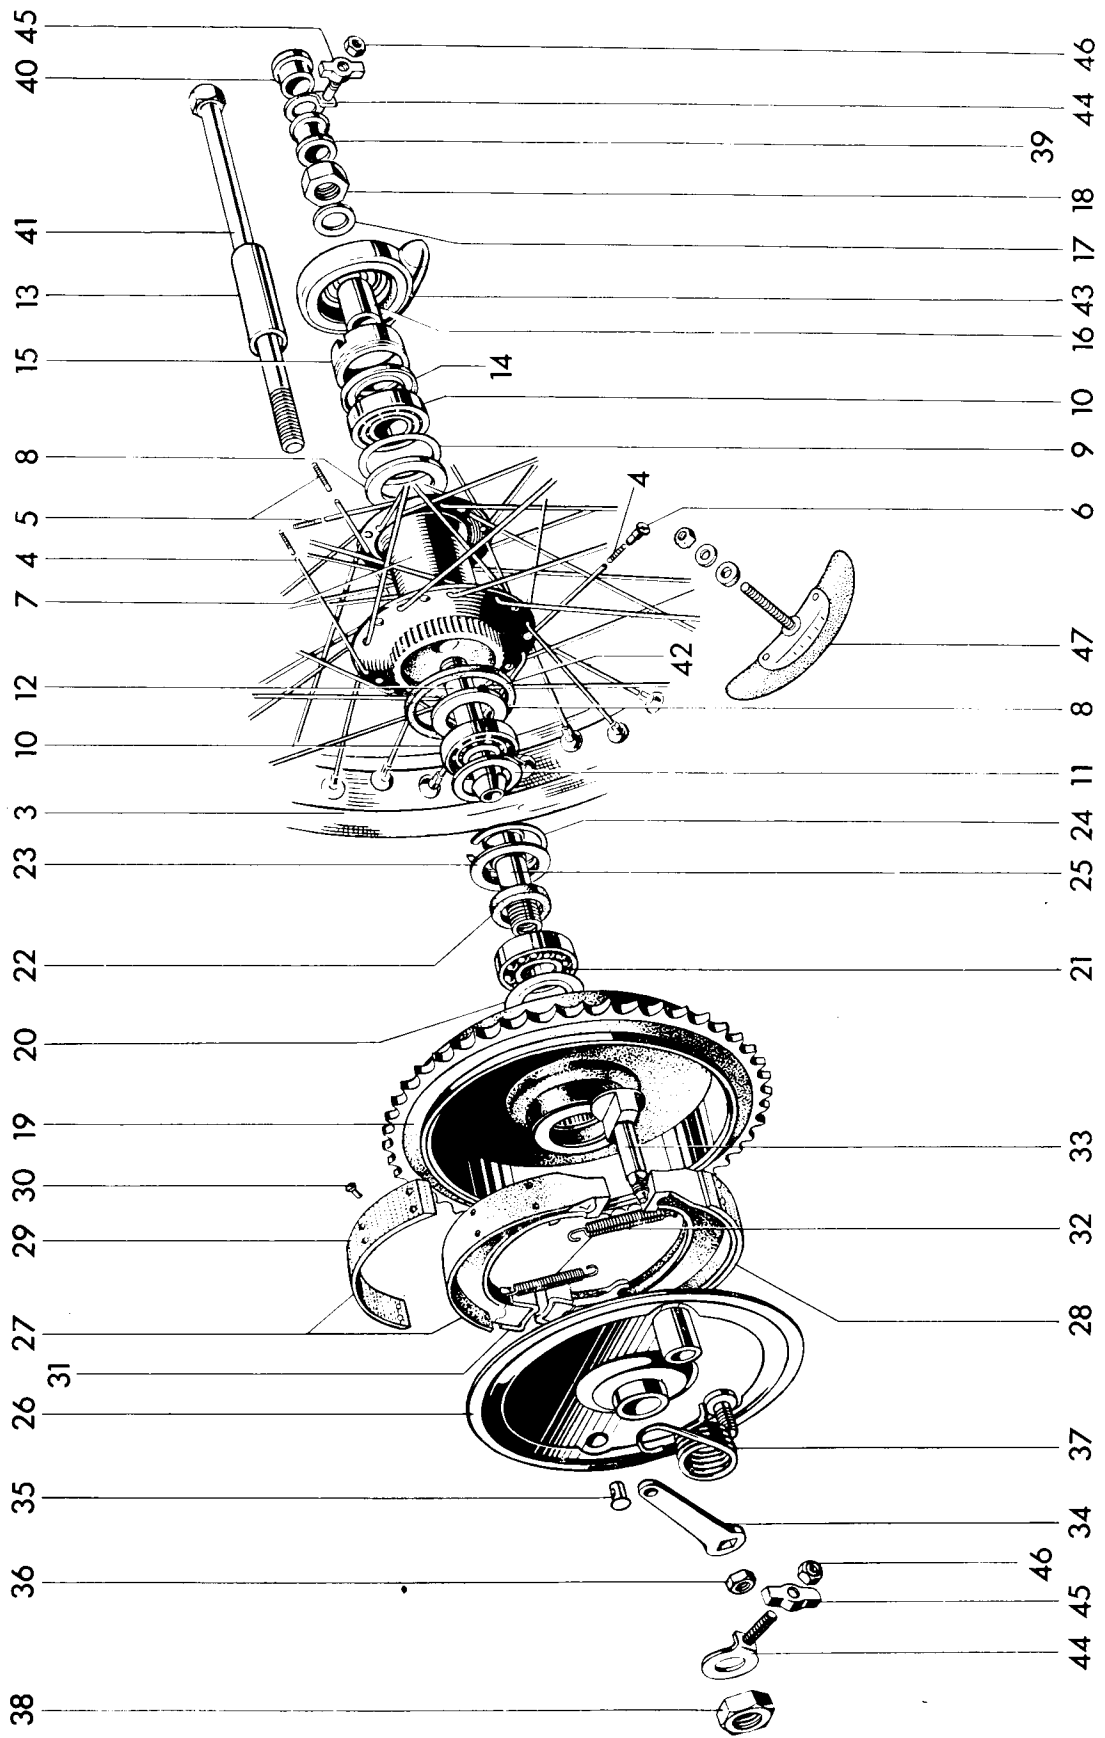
QUICKLY DETACHABLE REAR WHEEL (NOT U.S.A.)
